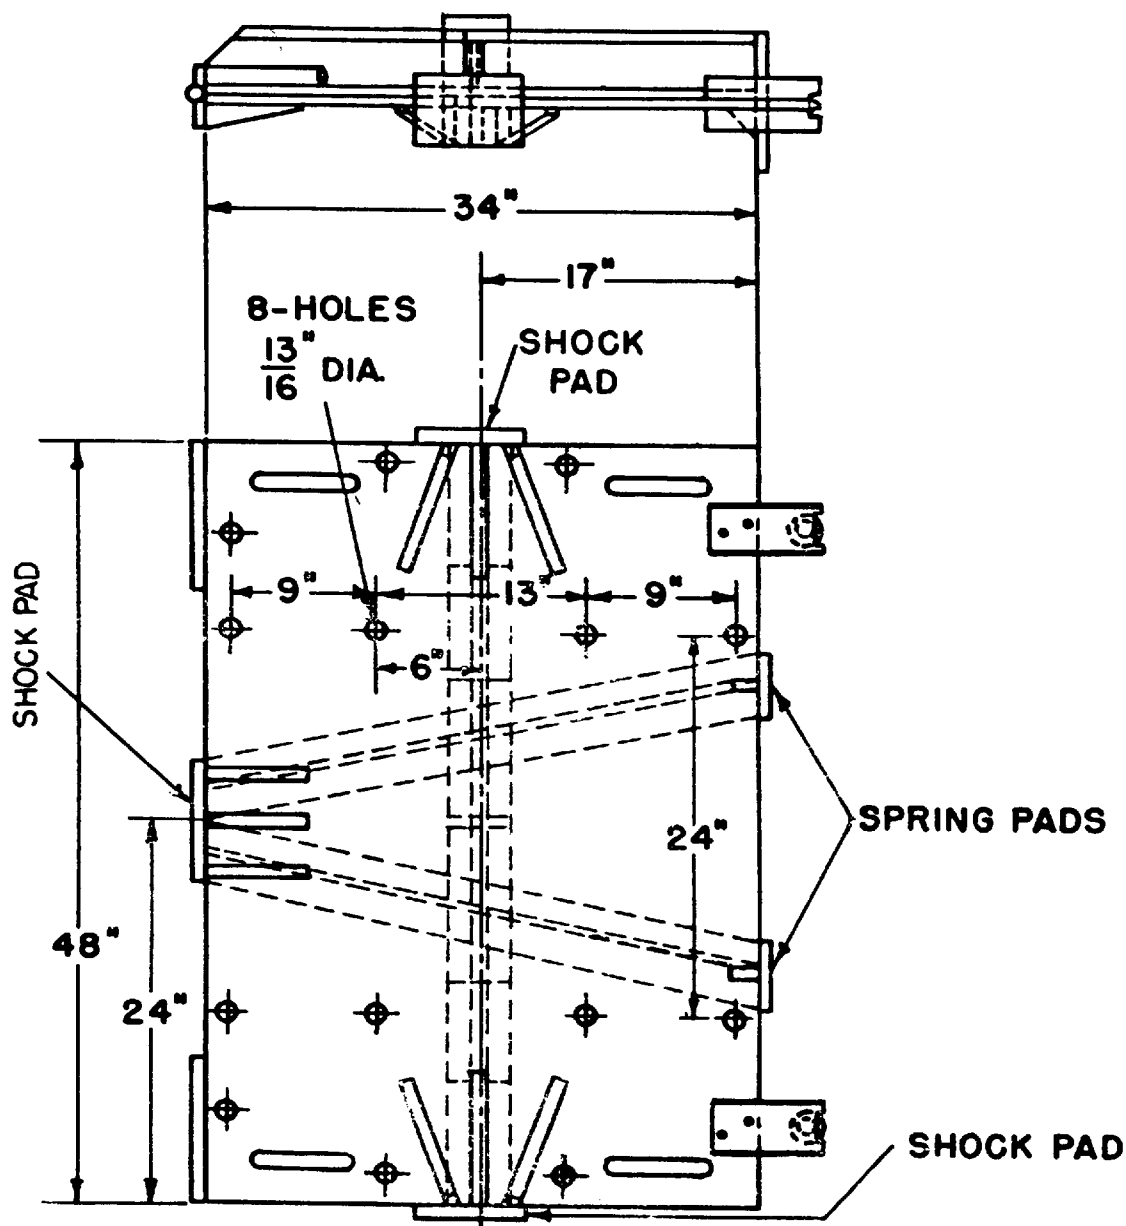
ANVIL PLATE OF SHOCK-TESTING MACHINE
